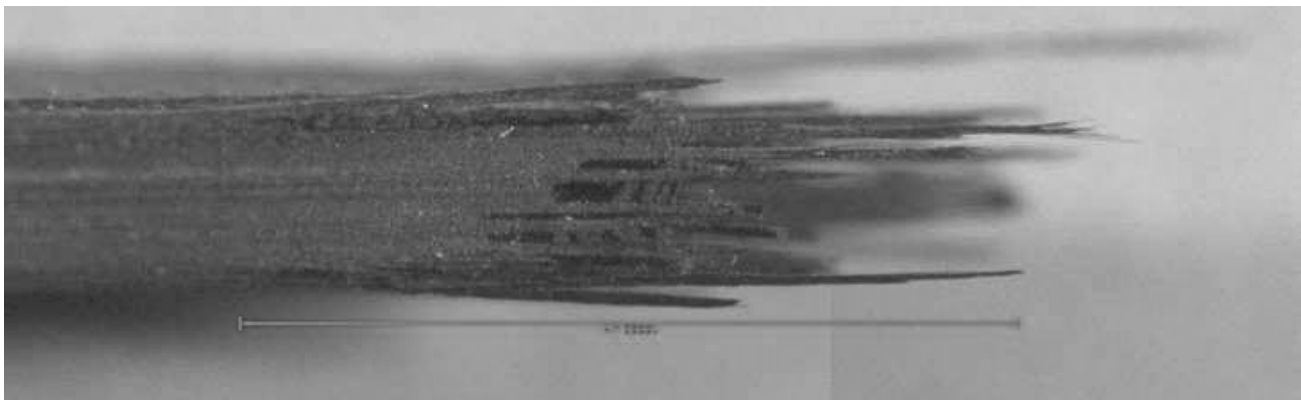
The top back side of the [0/90] IM7/ BMI 5250-4 specimen showing a close up view of the fiber fracture and pull out when subjected to tensile load to failure at 191°C
